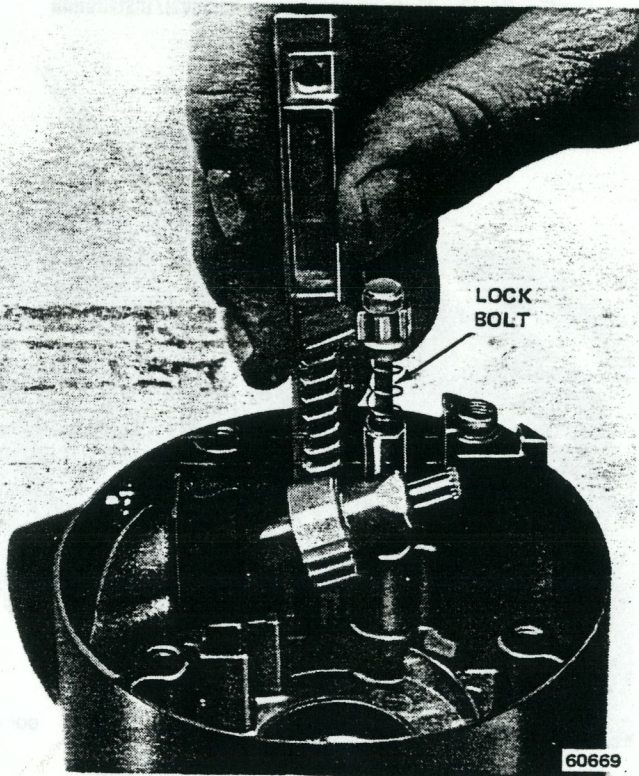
J-14 Lock Rack and Lock Bolt Removal
